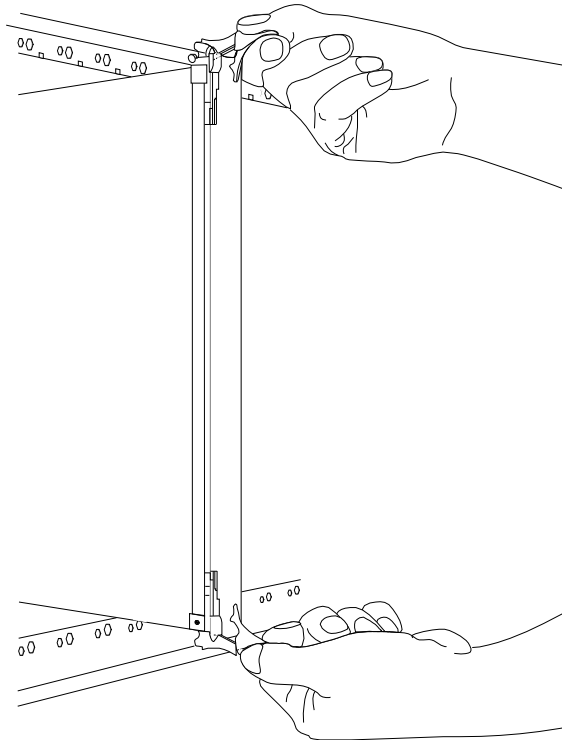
ATCA Front Board Handles - Second Step to Remove a Board
